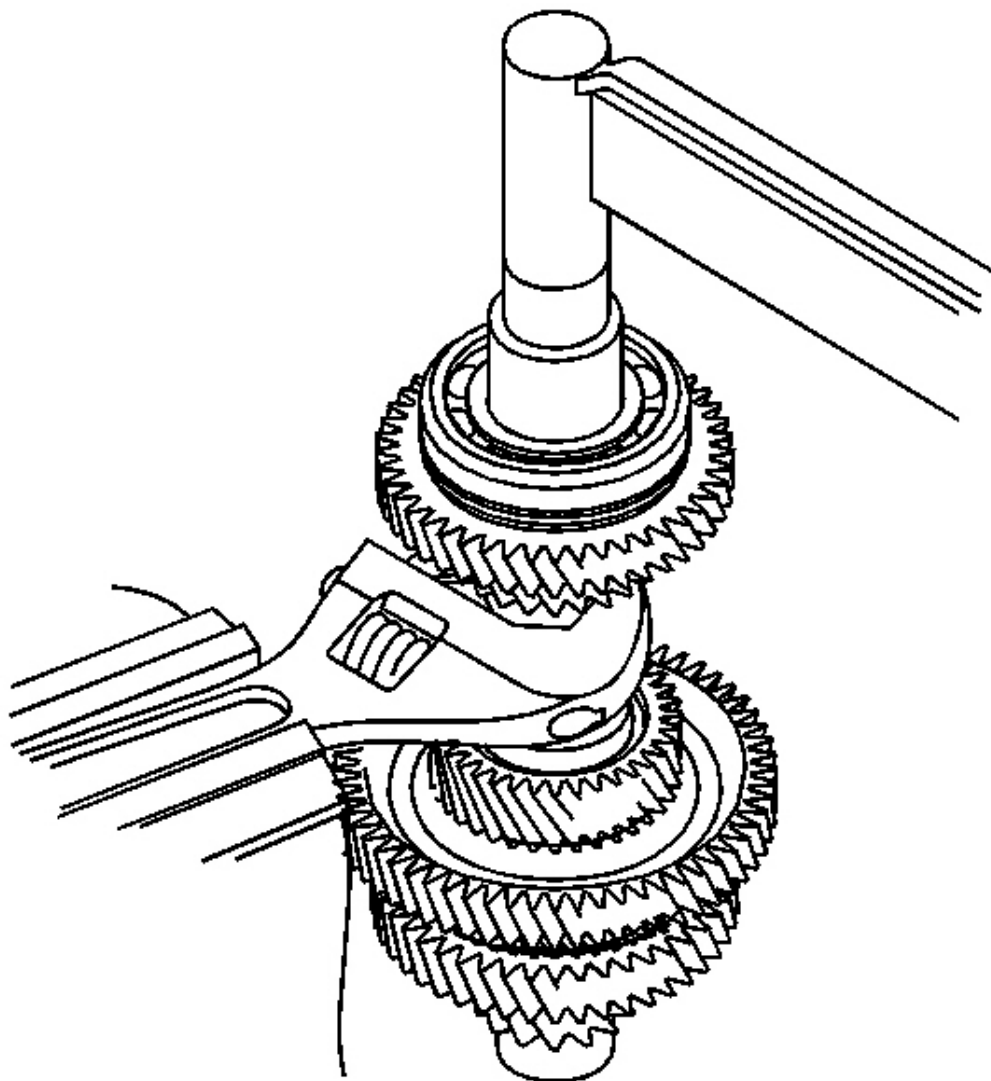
Tightening The Retaining Nut Using A Wrench Mounted In A Vise
